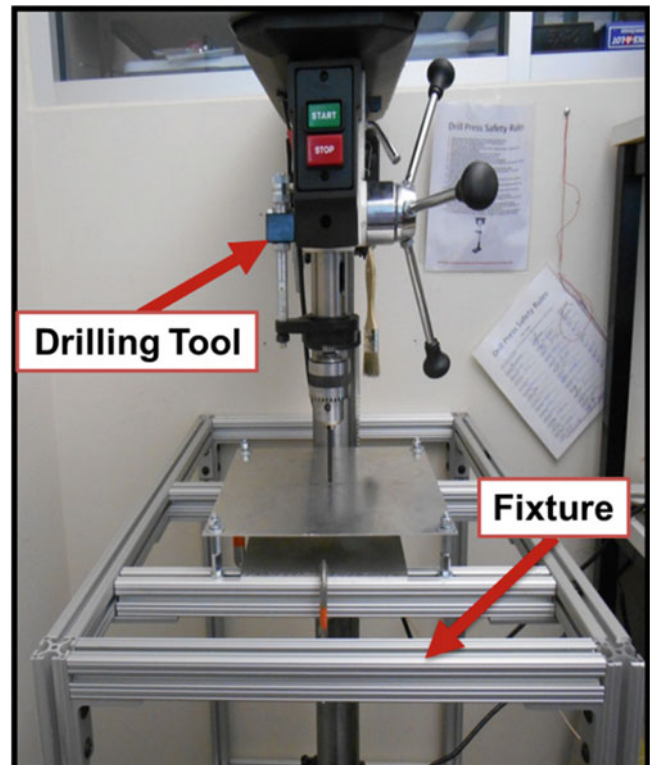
Jet JDP-15MF drill press and drilling target fixture
